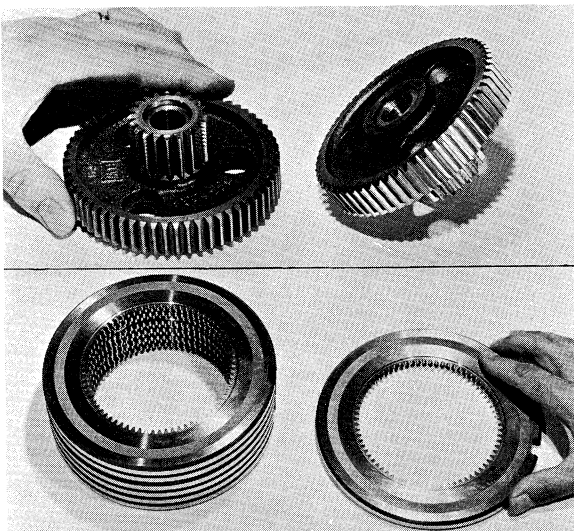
A 16-pitch cast iron running gear whose 0.0002-in. tooth profiles are assured by using the illustrated full-form finishing rings at the rear of the ring-type broach assembly. The part is produced in 22-seconds on a Model VBA machine.
